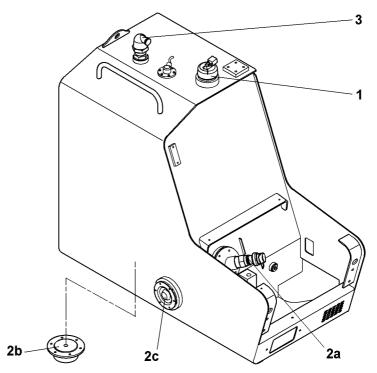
Fuel tank equiped with quick refuelling coupling
